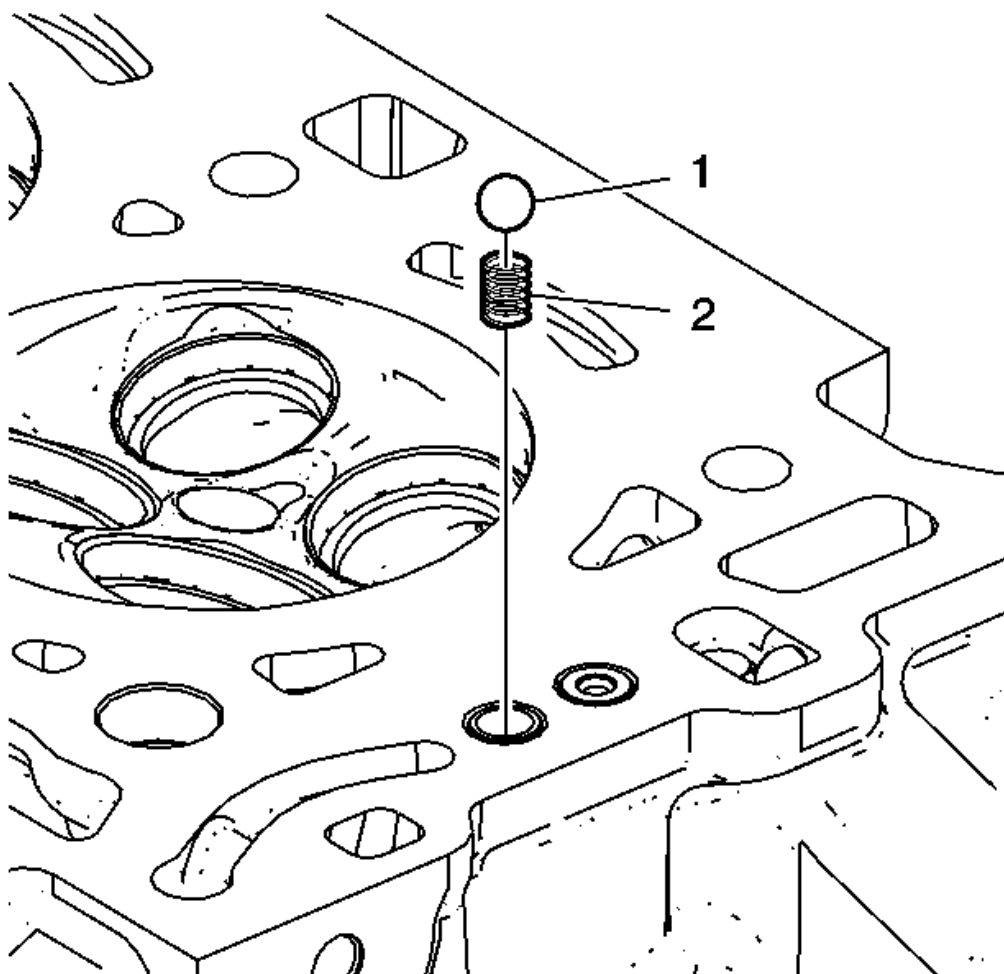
View Of Camshaft Position Actuator Oil Feed Check Valve
